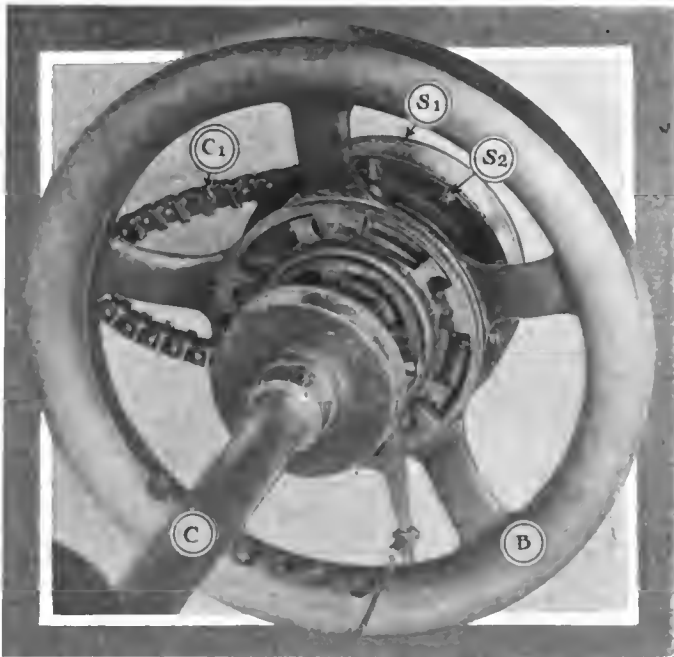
View of side chain drive from back of flywheel showing how the control cable is attached to lever system
